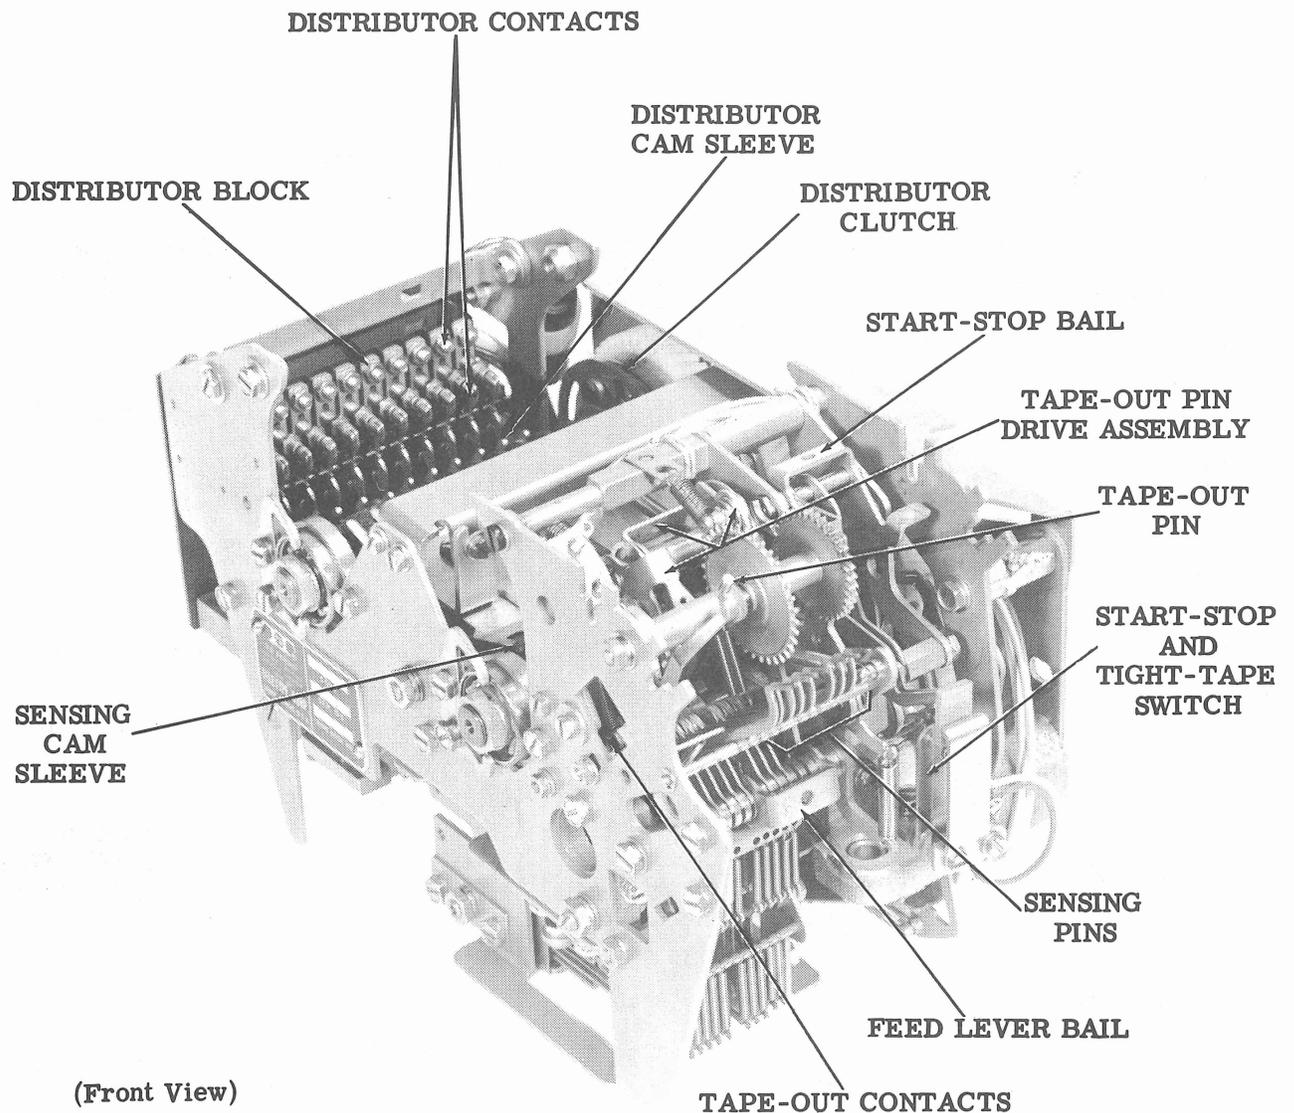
Typical 35 Transmitter-Distributor Unit, Top, Cover, and Tape Guideplate Removed
